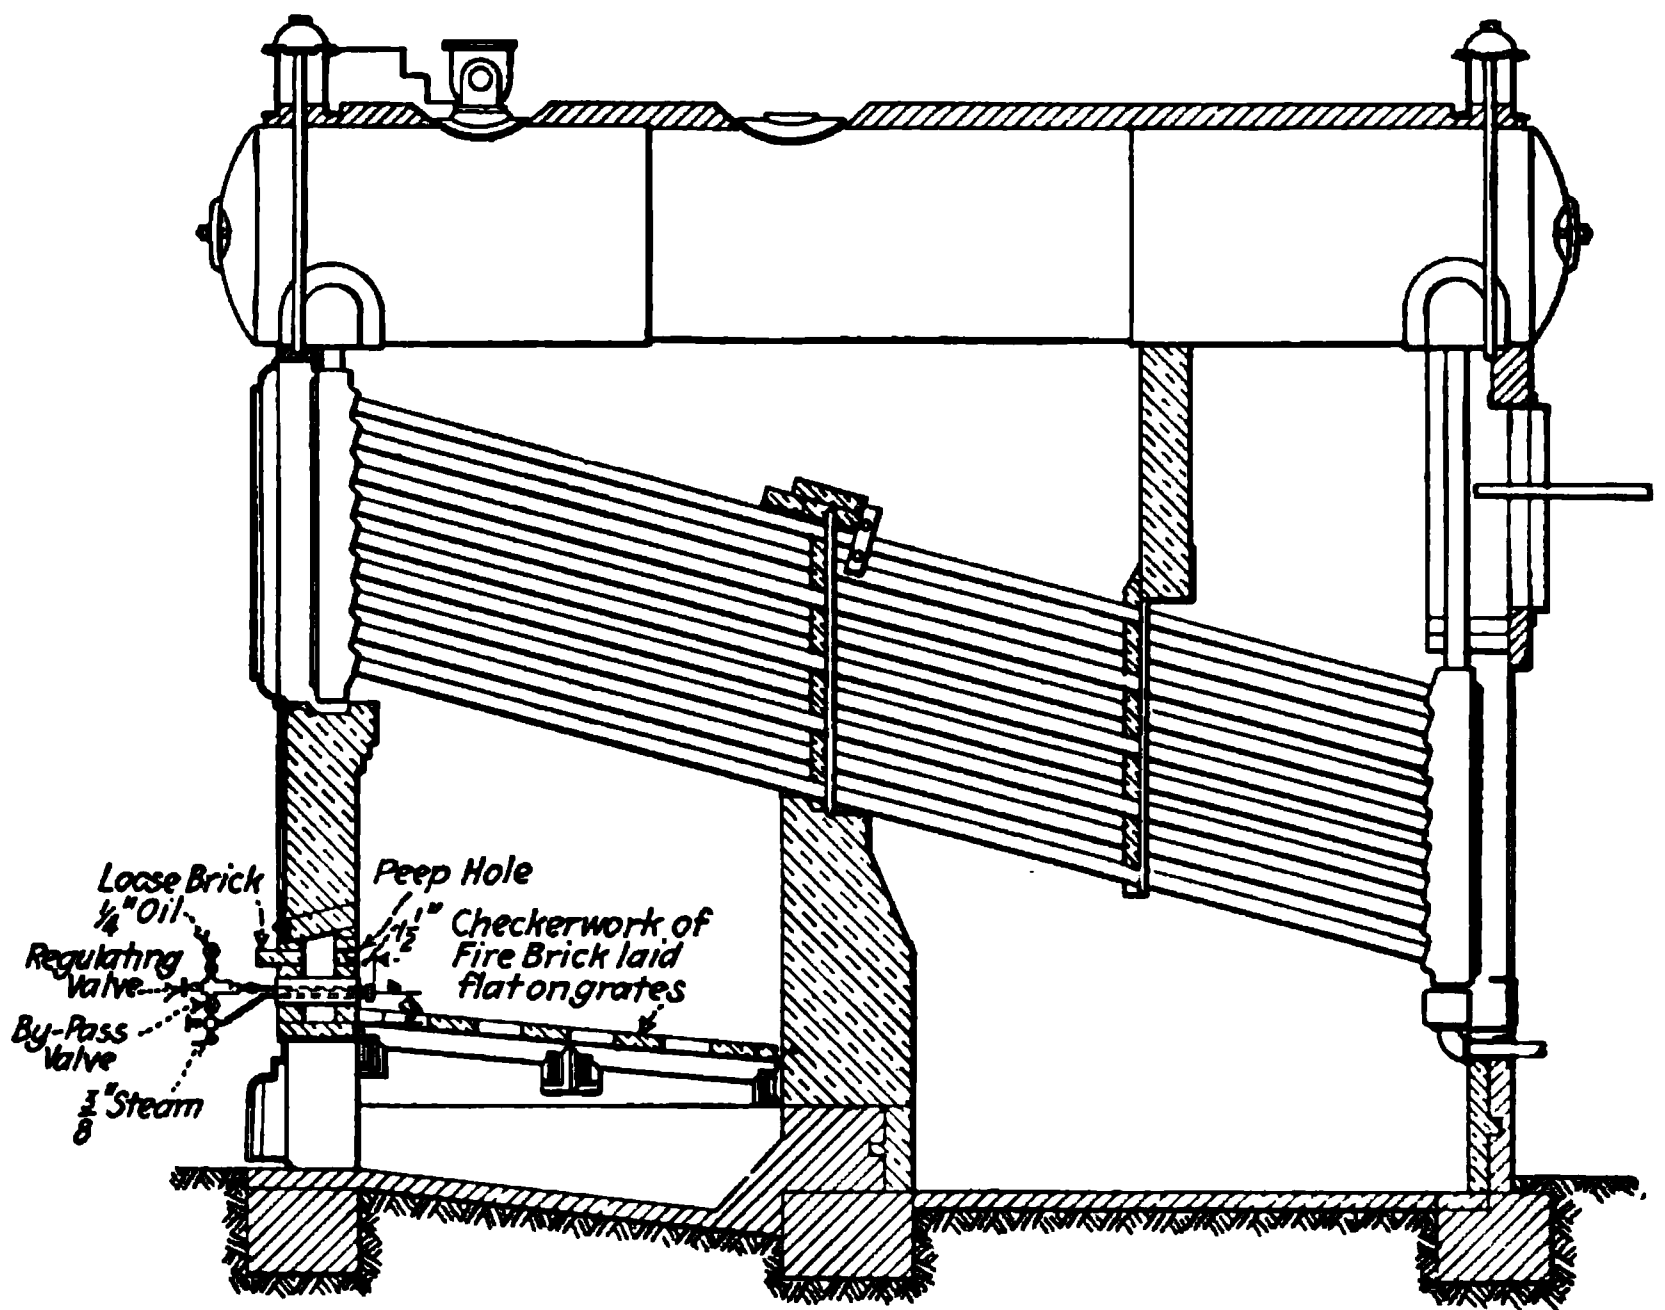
Lockett front shot burner in B. & W. boiler.
